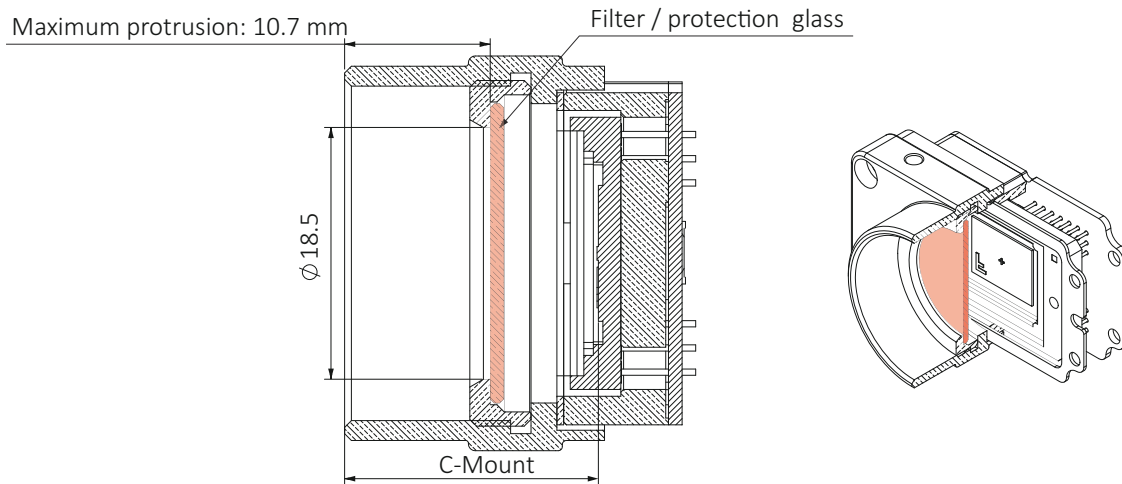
Manta type B C-Mount dimensions (22 mm filter)
